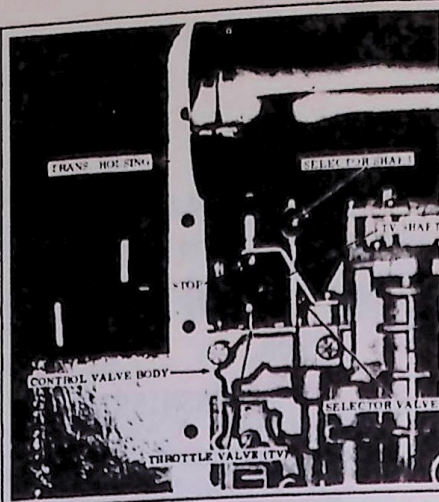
View Showing TV and Selector Control Linkage - Oil Pan Removed.
